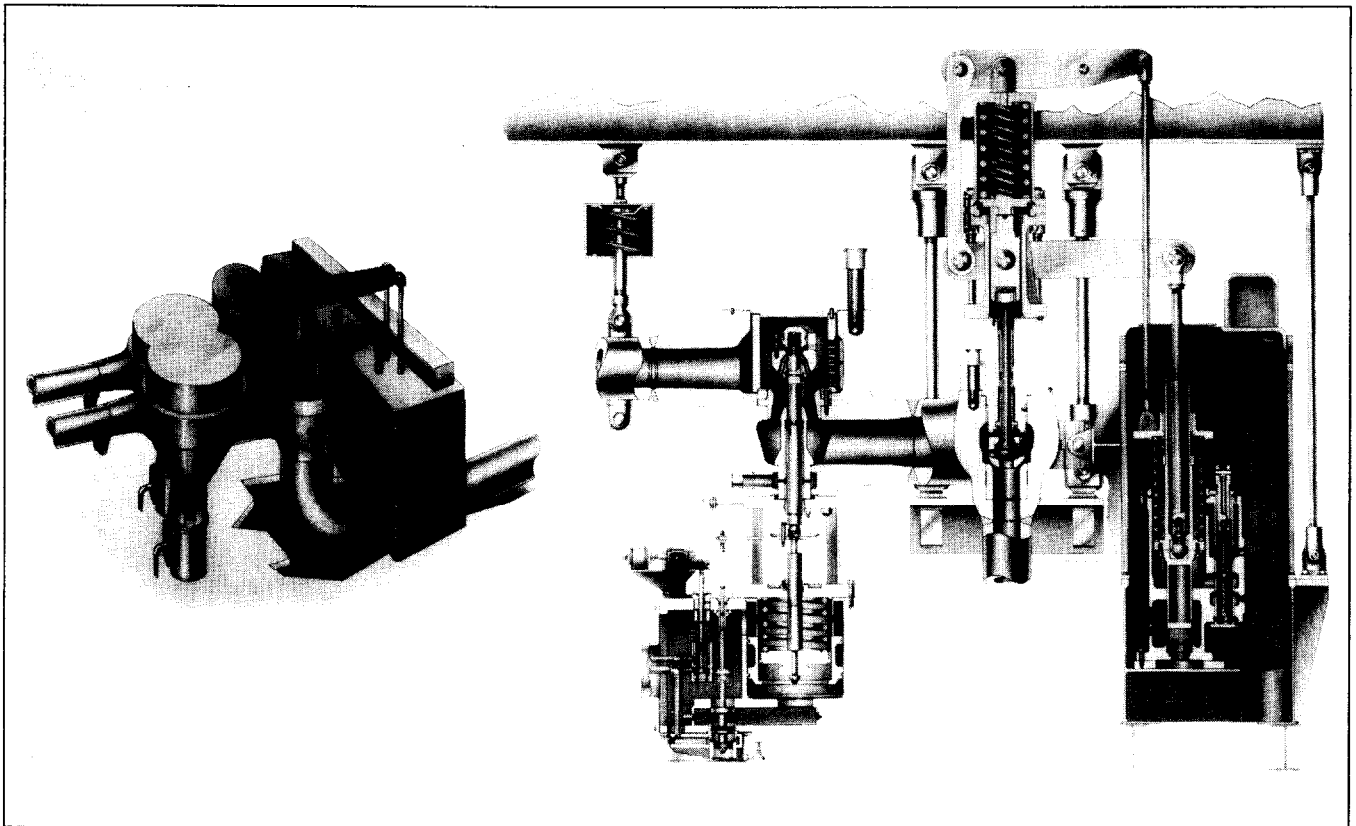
Typical stop-control valve assembly with off-shell valve chest
